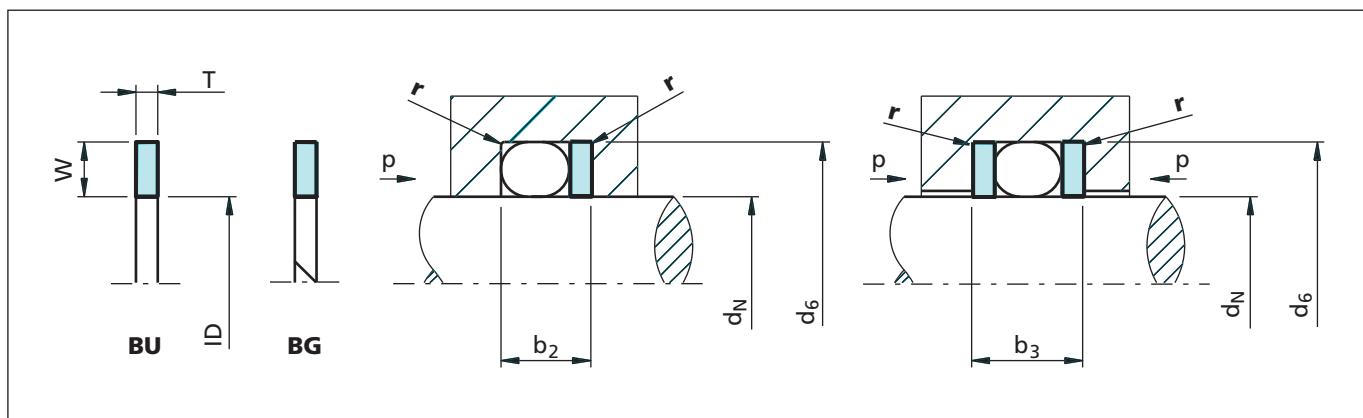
Installation drawing internal sealing, rectangular Back-up Ring types
